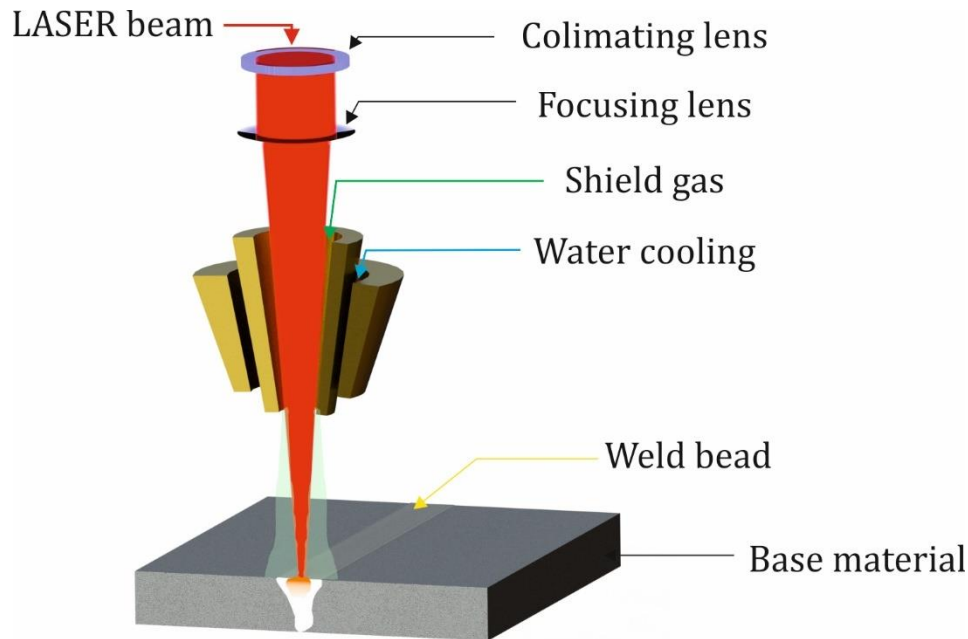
3D schematic representation of the laser welding principle.
